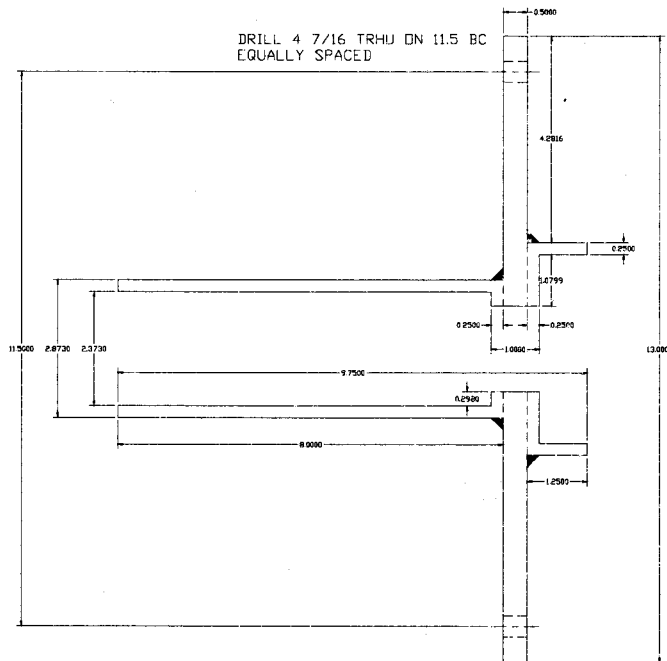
Stator Inner Mounting Plate (Closest to Slip Rings)
